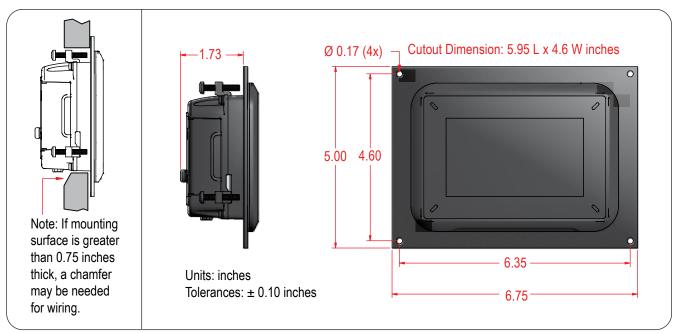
Dimensions, & Footprint for 4.3" Remote (optional)
